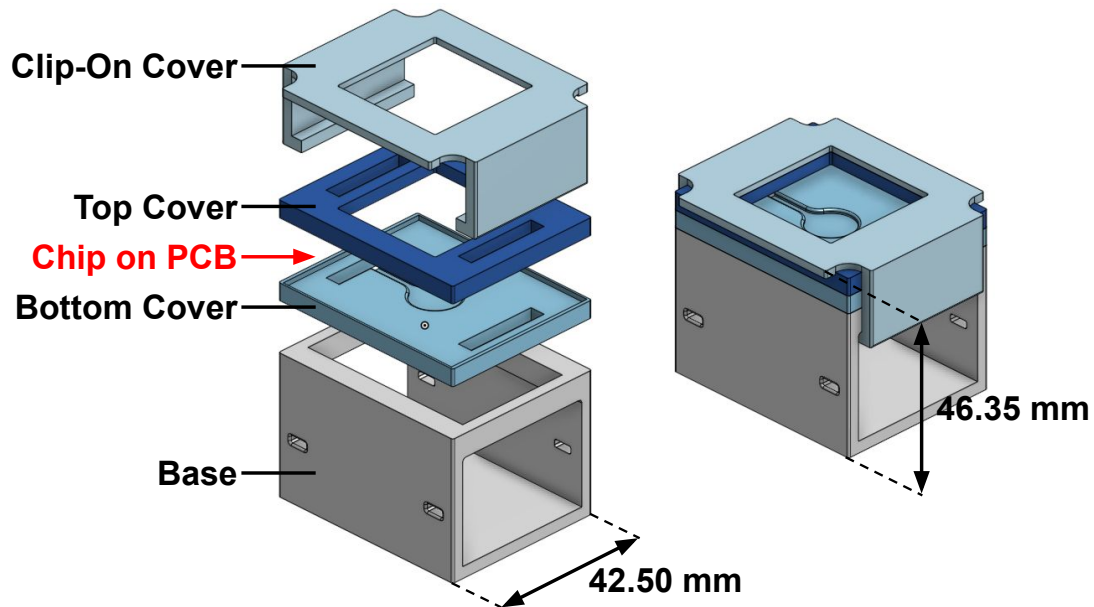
(Left) Blow-Up of the Boiling Platform. Space for the chip on PCB is shown in red. (Right) Assembled Boiling Platform without the chip on PCB.
